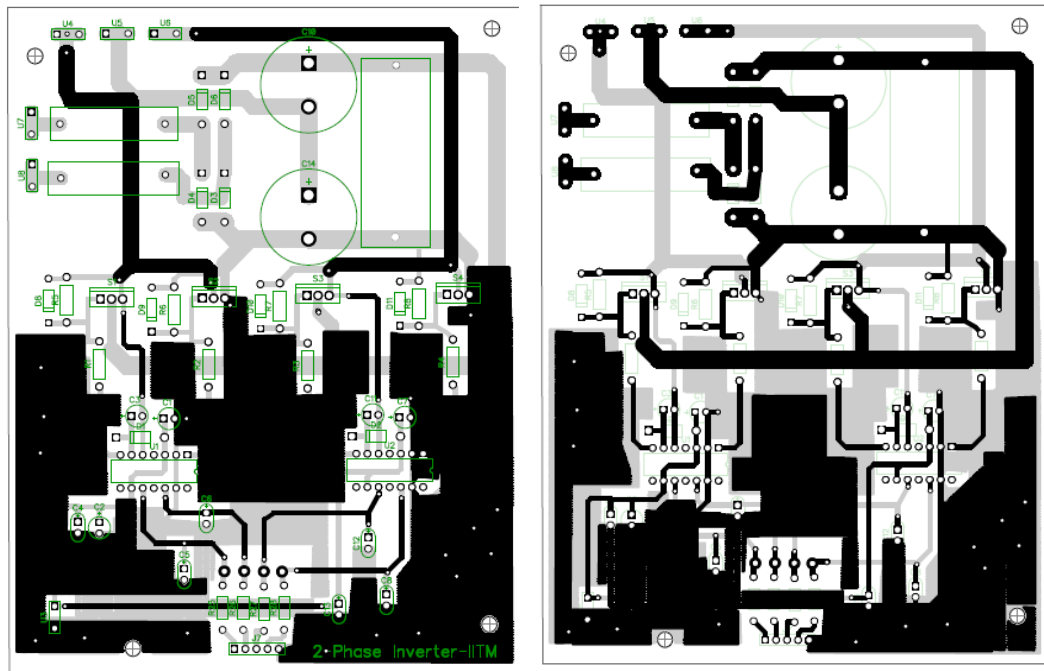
(a)PCB-top surface (b) PCB-bottom surface
